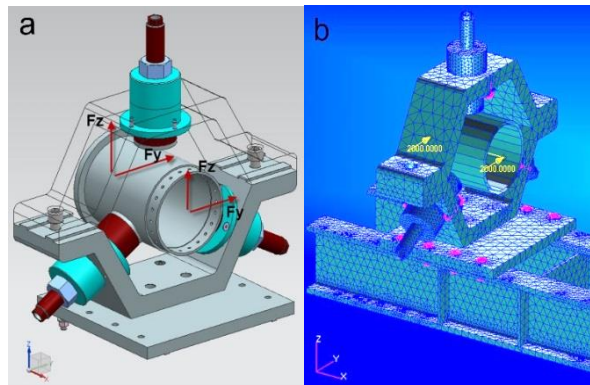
(a) CAD and (b) FEM-mesh model of sensing rods assembly
